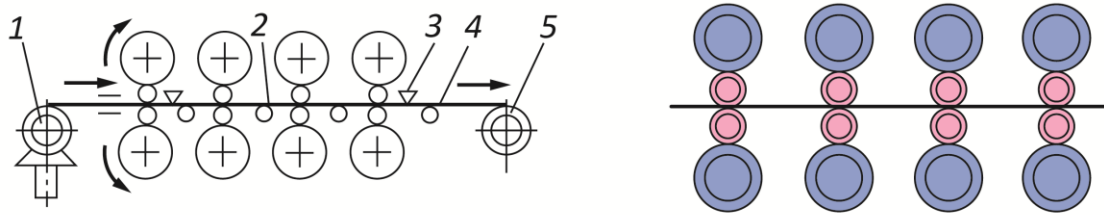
Schemes of rolling on a four-stand continuous tandem mill 1680:
